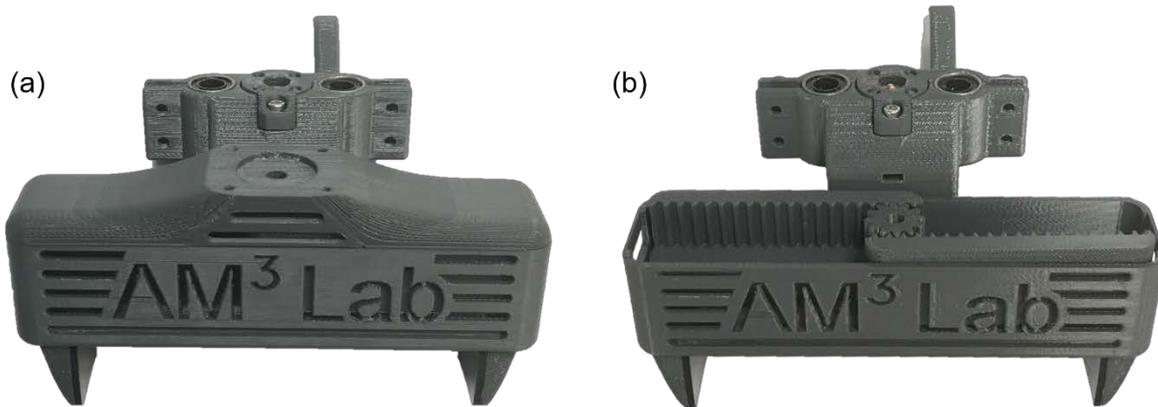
(a) Photo of final gripper prototype assembly; (b) photo of the rack and pinion mechanism installed within the gripper prototype.
